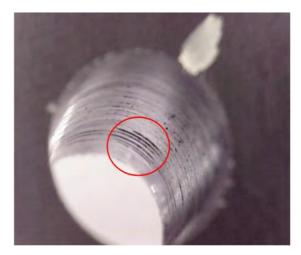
Surface finish defects in under-sized drilled hole
